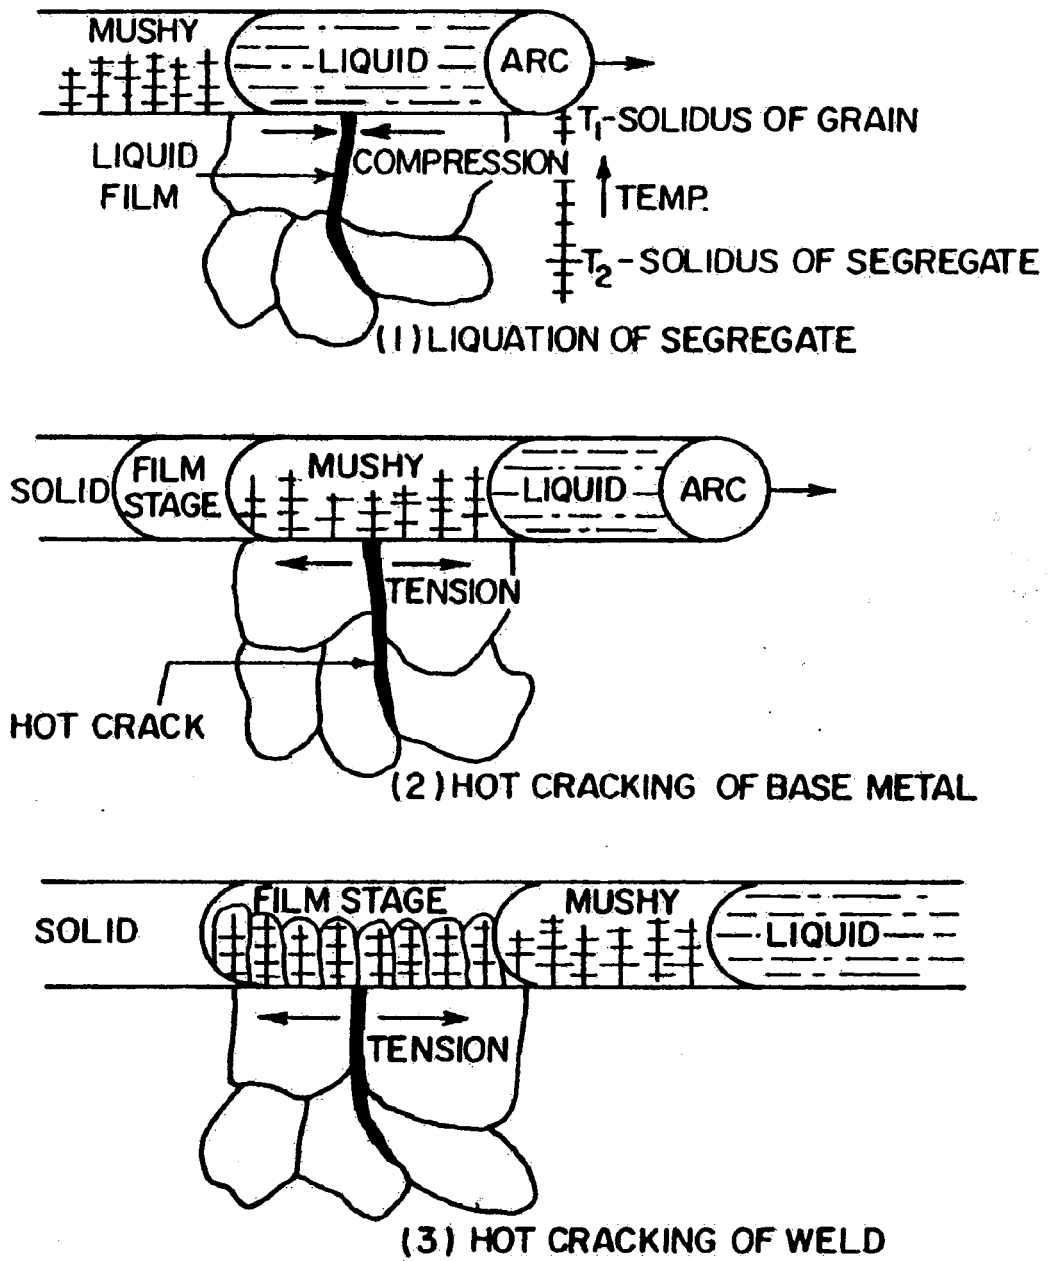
Schematic illustration of weld hot cracking process [86].
